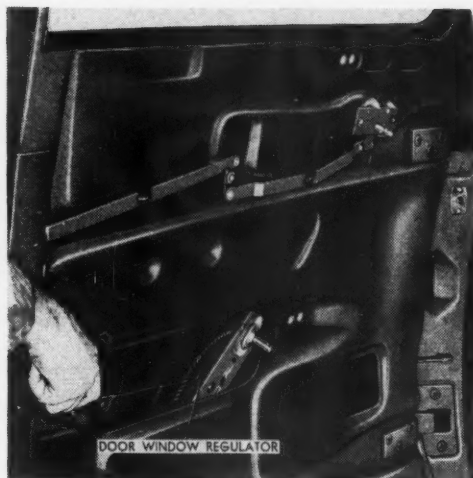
Remove the four star washers and screws and take out the regulator assembly.
